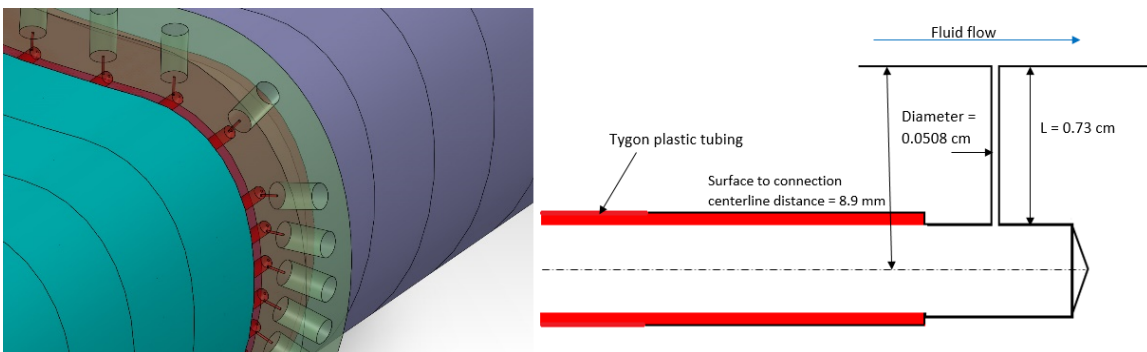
Jig for drilling holes on vane surfaces (Left) In reference to the vane surface (Right), dimensional specifications [51]
